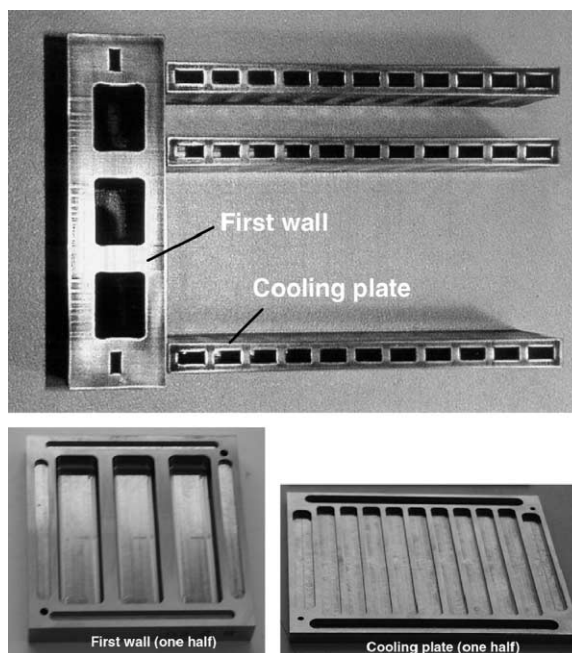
First wall and cooling plate specimens used for HIP experiments [3].
